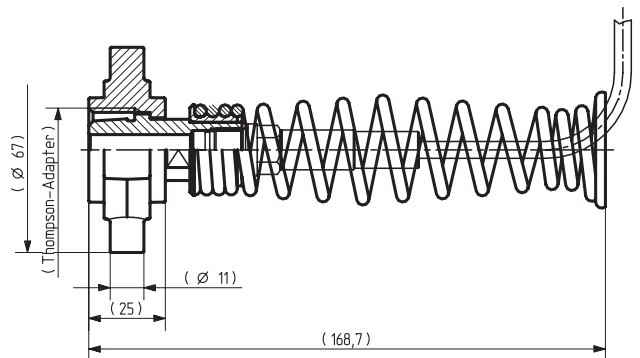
Sensor mounting in Thompson-Adapter Type 7513A
